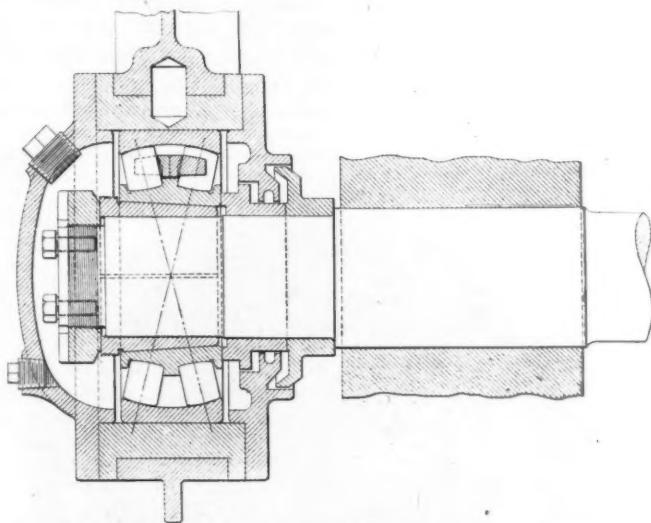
Journal Box for Motor Rail Car Equipped with Spherical Roller Bearing
